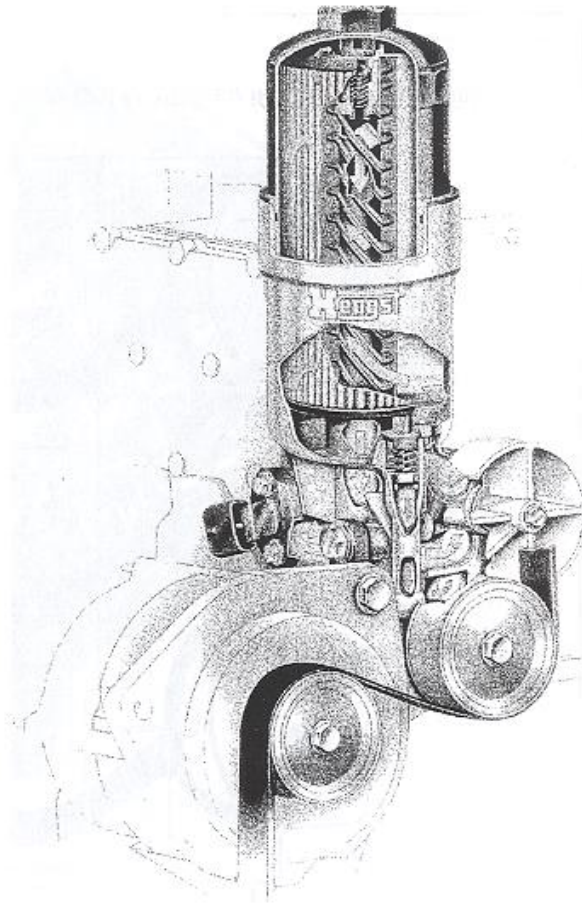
Oil pump of a Heavy Duty Diesel Engine
